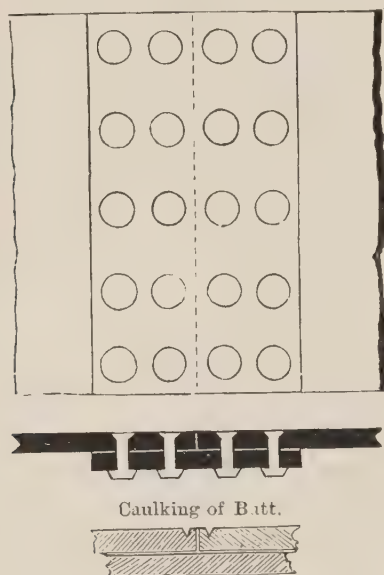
BUTT STRAP: DOUBLE CHAIN RIVETING.
